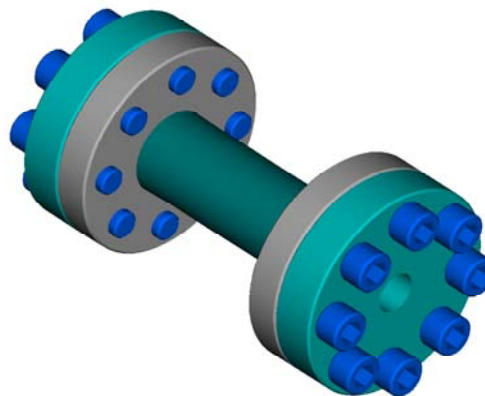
DESIGNER'S RENDITION OF THE 50.8MM STEX VESSEL. NOTE THE VESSEL TUBE, BRAZED FLANGES THICK END CAPS AND LARGE BOLTS.
